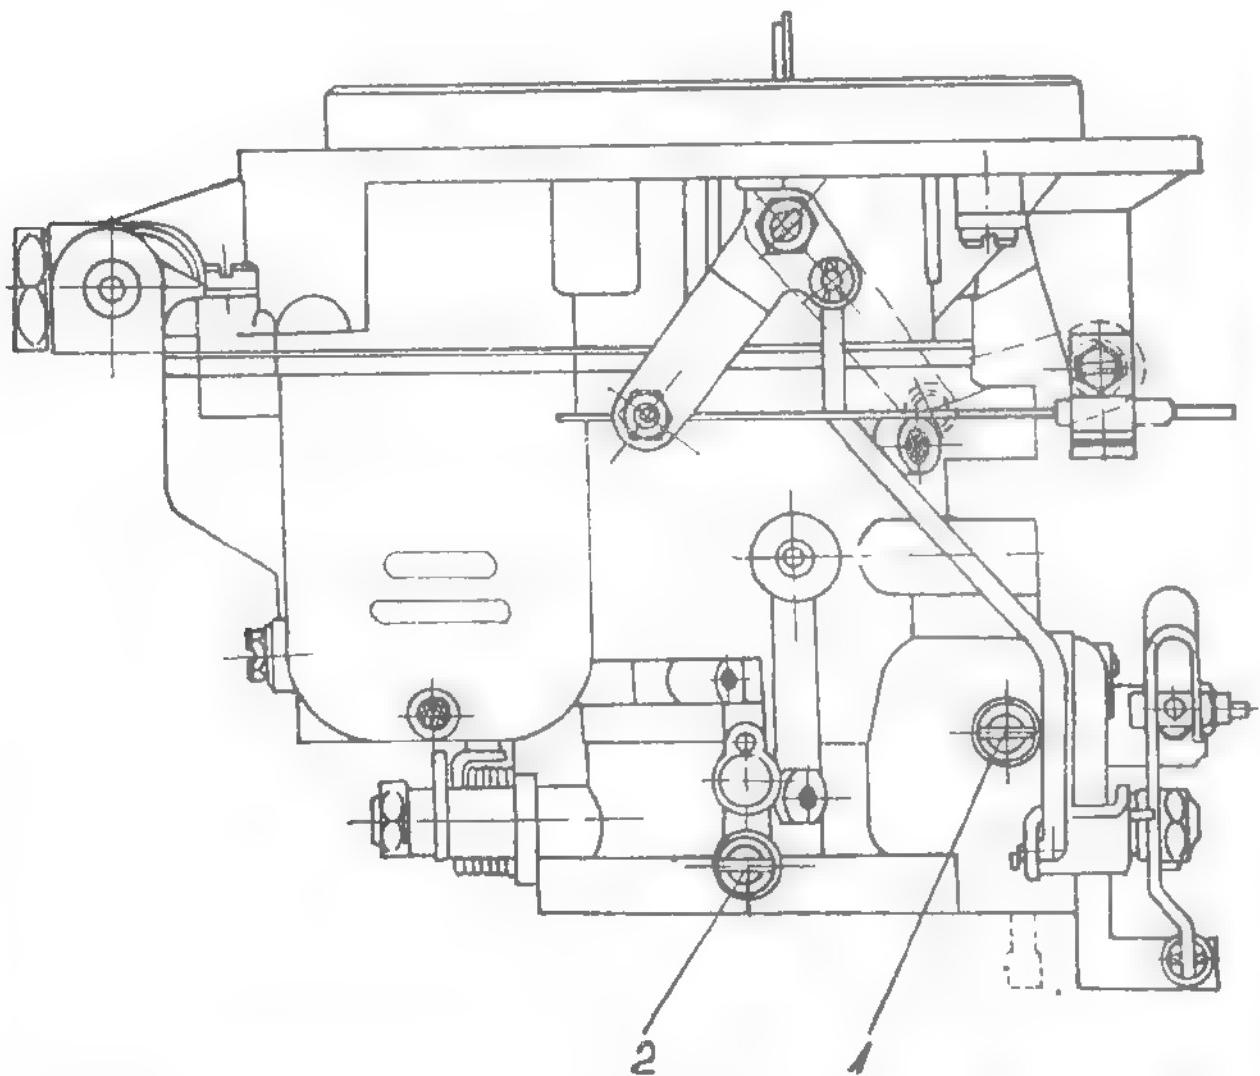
LOCATION ON CARBURETTOR OF IDLE SPEED ADJUSTING SCREWS.
